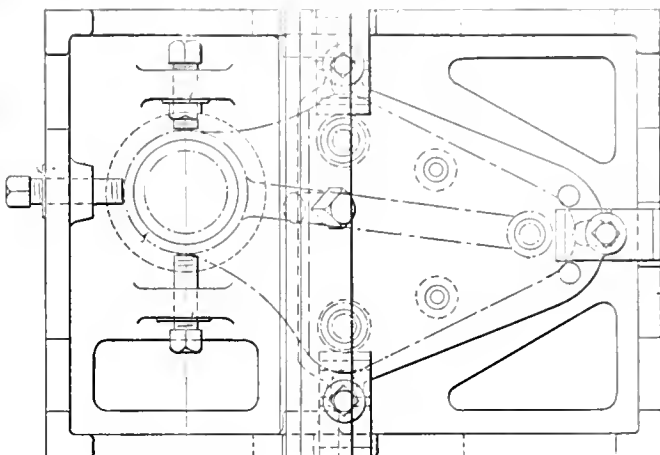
Simple Form of Plate Jig for Drilling Bracket shown in Fig. 97, after Hole *E* has been bored in the Lathe.
